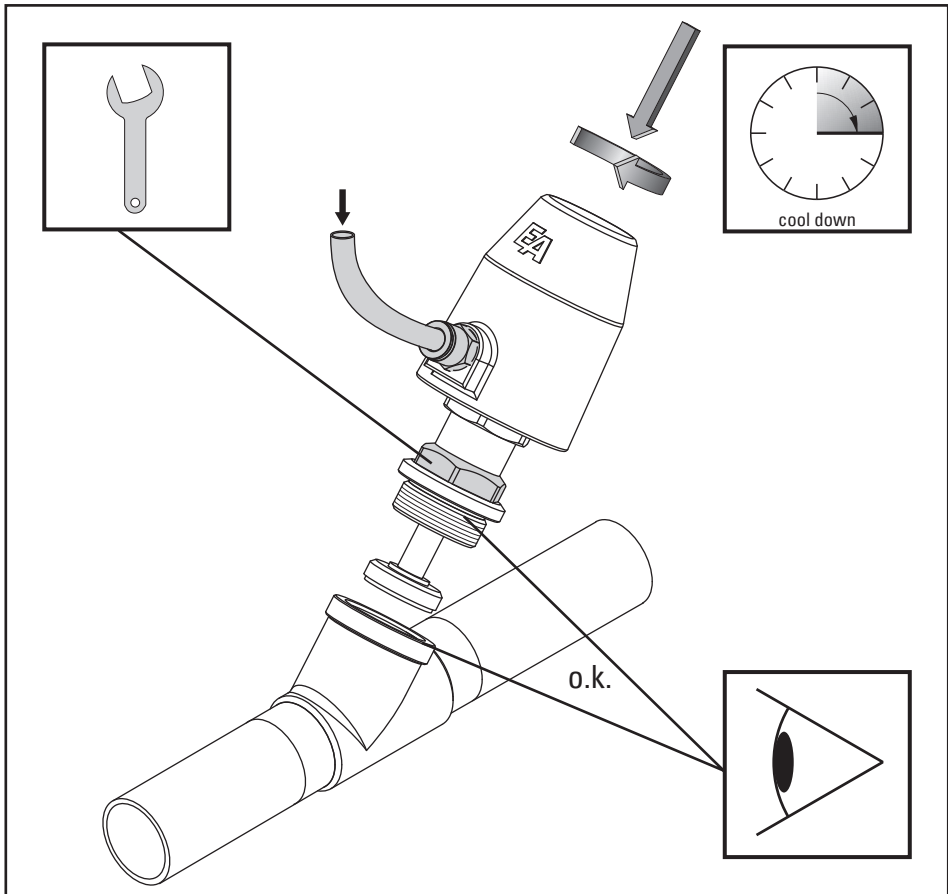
mounting / disassembly - welded connection, mounting of the valve top
